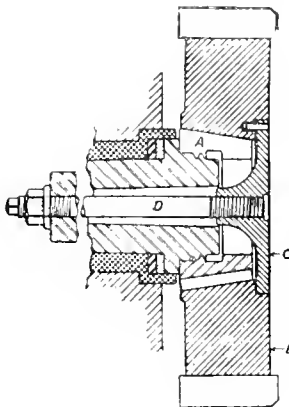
Section Through Quick Releasing Face Milling Cutter
